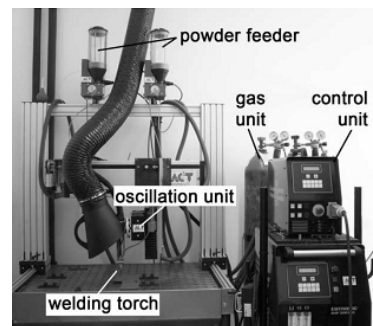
PTA welding plant at AC²T (European Centre of Tribology)
